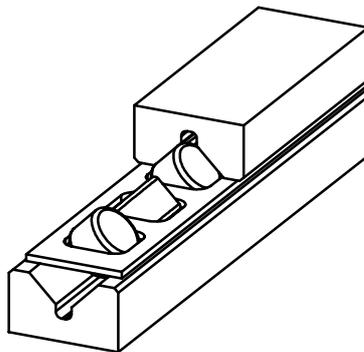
Non-recirculating linear roller bearing, linear guideway, crossed roller type
